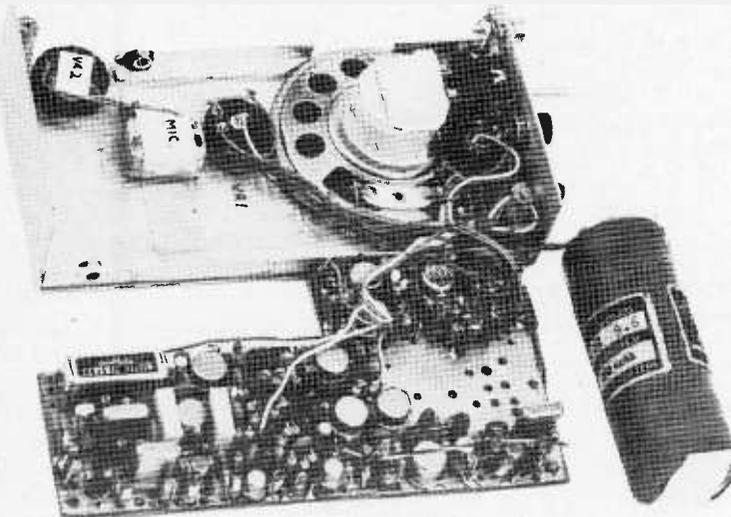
This shows the transceiver opened to give full access to both sides of the printed circuit board. It is fully operational in this condition.
